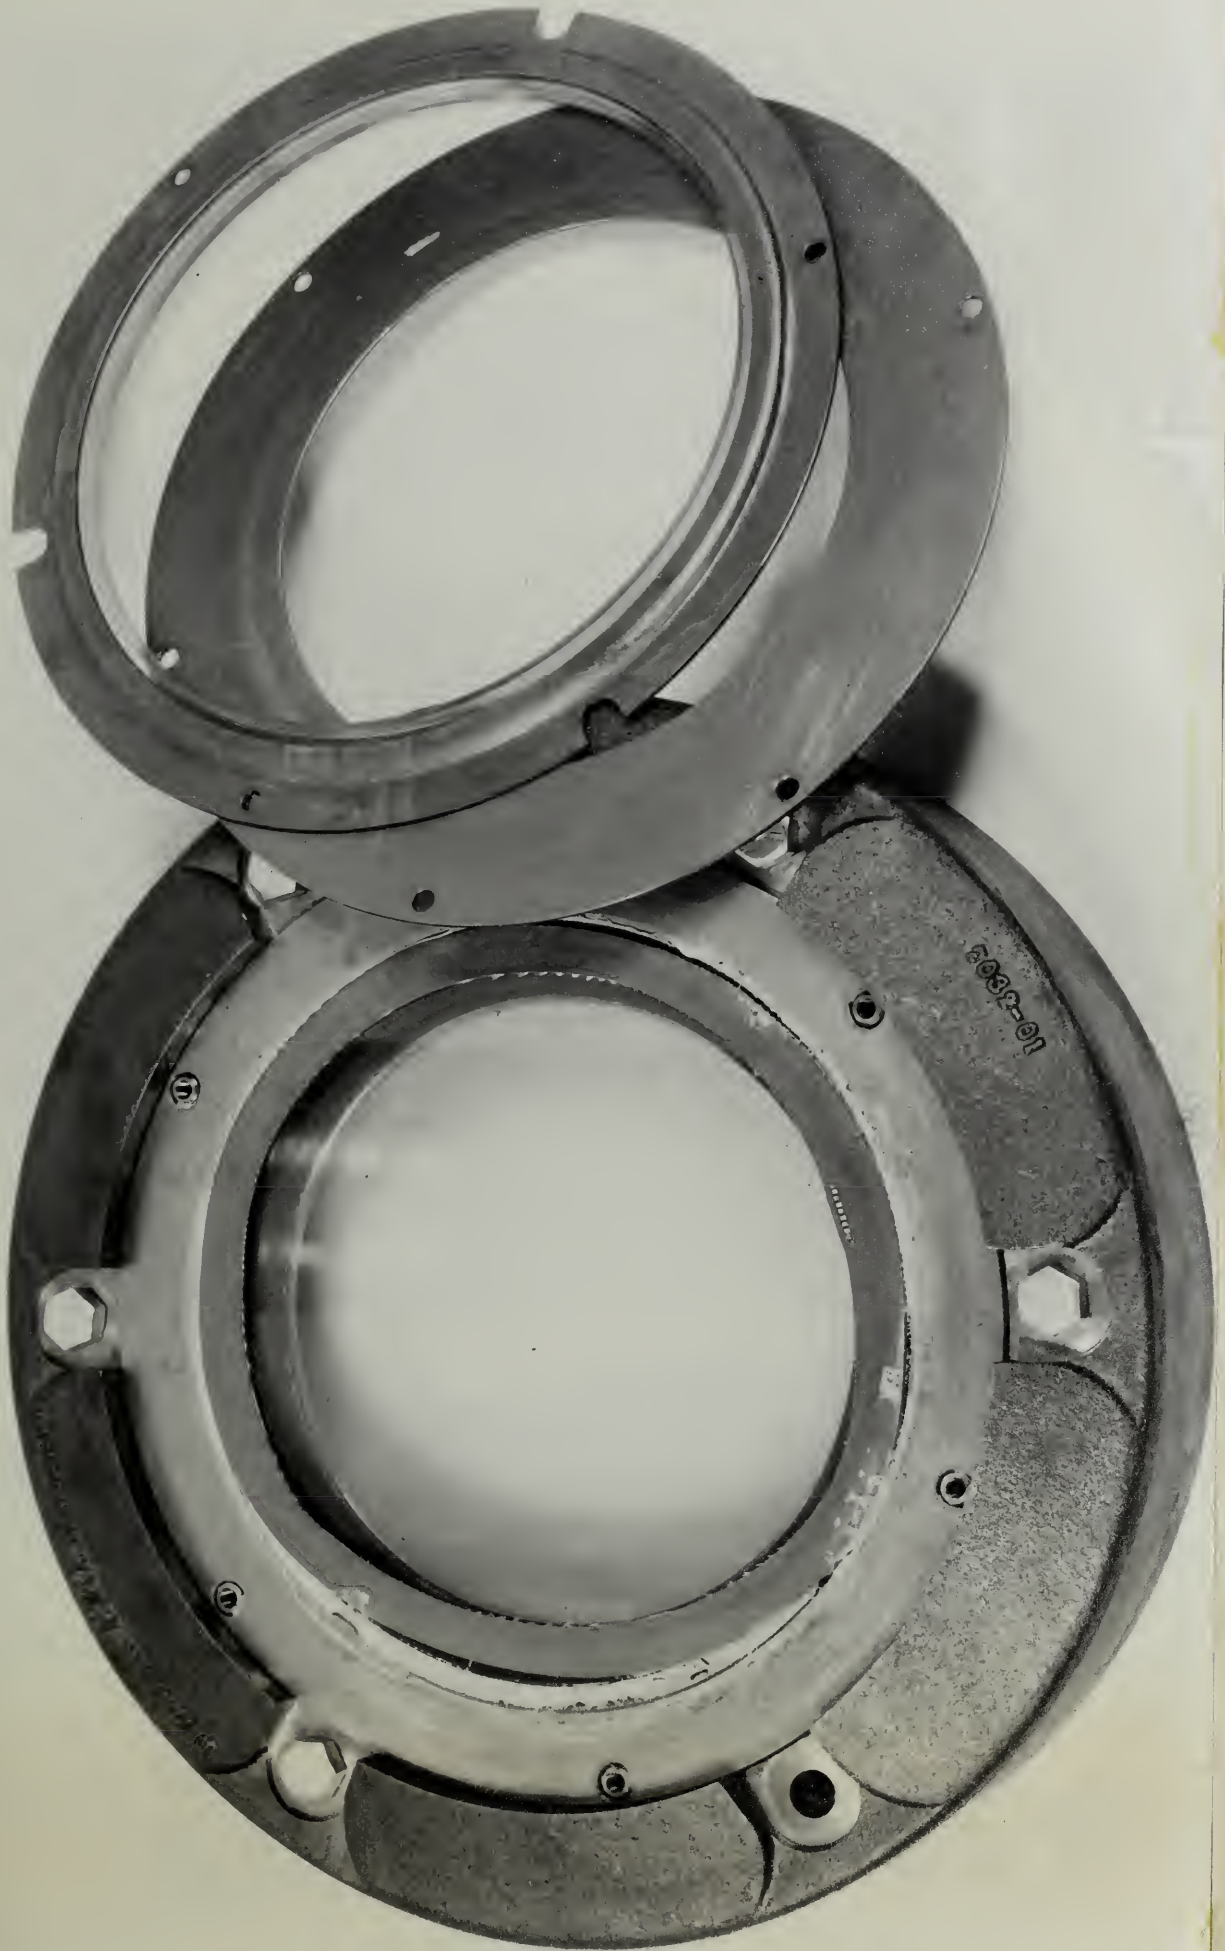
The partially disassembled light head components after test 3. The top gasket was extruded toward the center of the glass plate.
